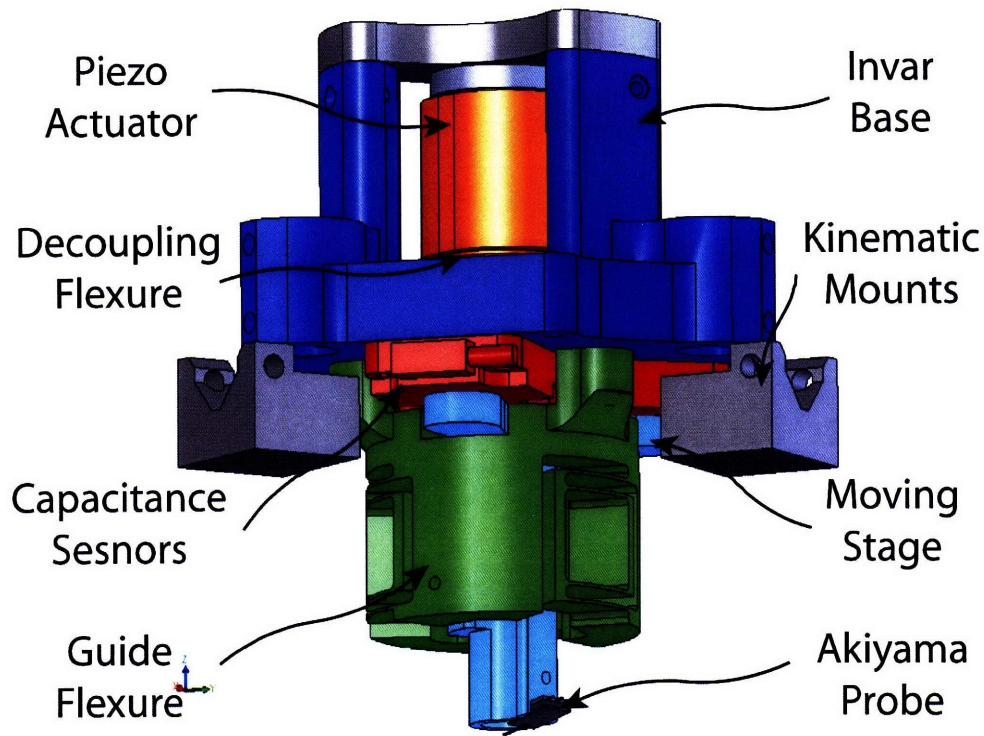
3 dimensional CAD drawing of the instrument shot from the underside.
